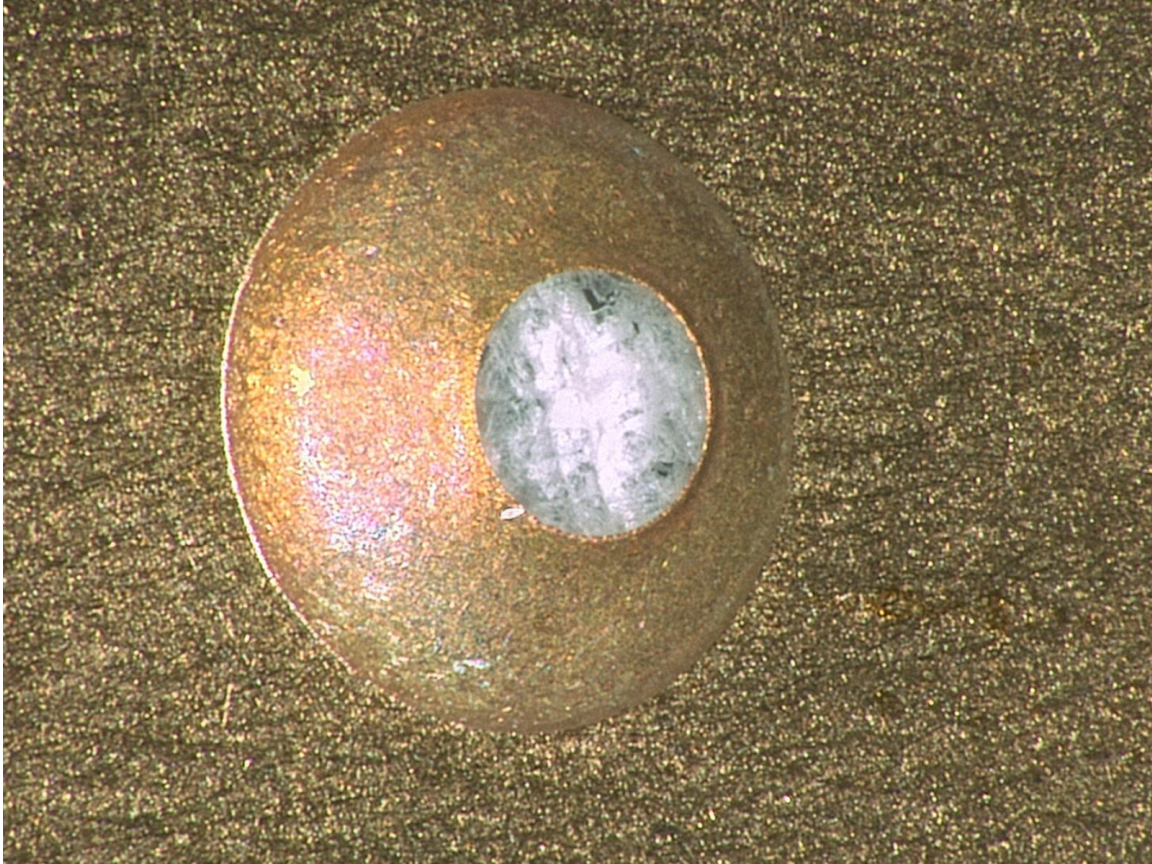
Image taken at 30° angle of 400 μm endcap electrode formed by wet chemical etching a piece of beryllium copper sheet metal. The bowl shaped feature formed by the one sided isotropic chemical etching process is visible from the outside of an assembled trap.
